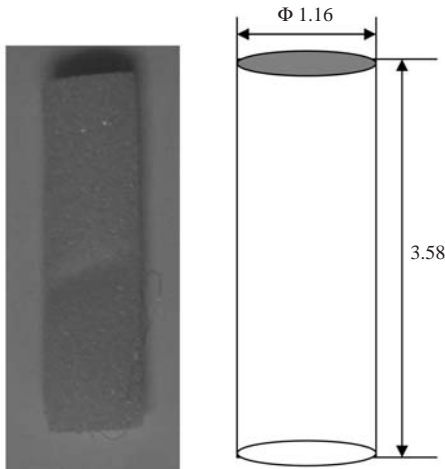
Photography of test sample and the dimension of cylinder type sample.
